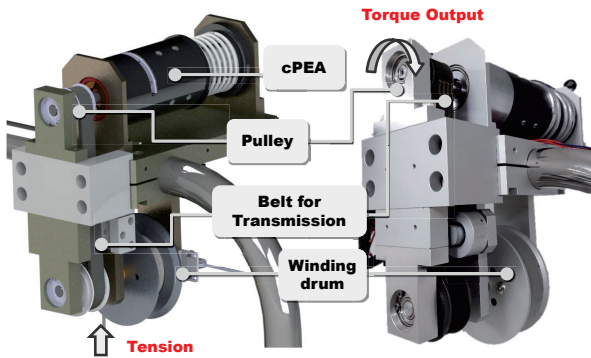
Proposed wire mechanism equipped with series elastic actuator and winding drum
